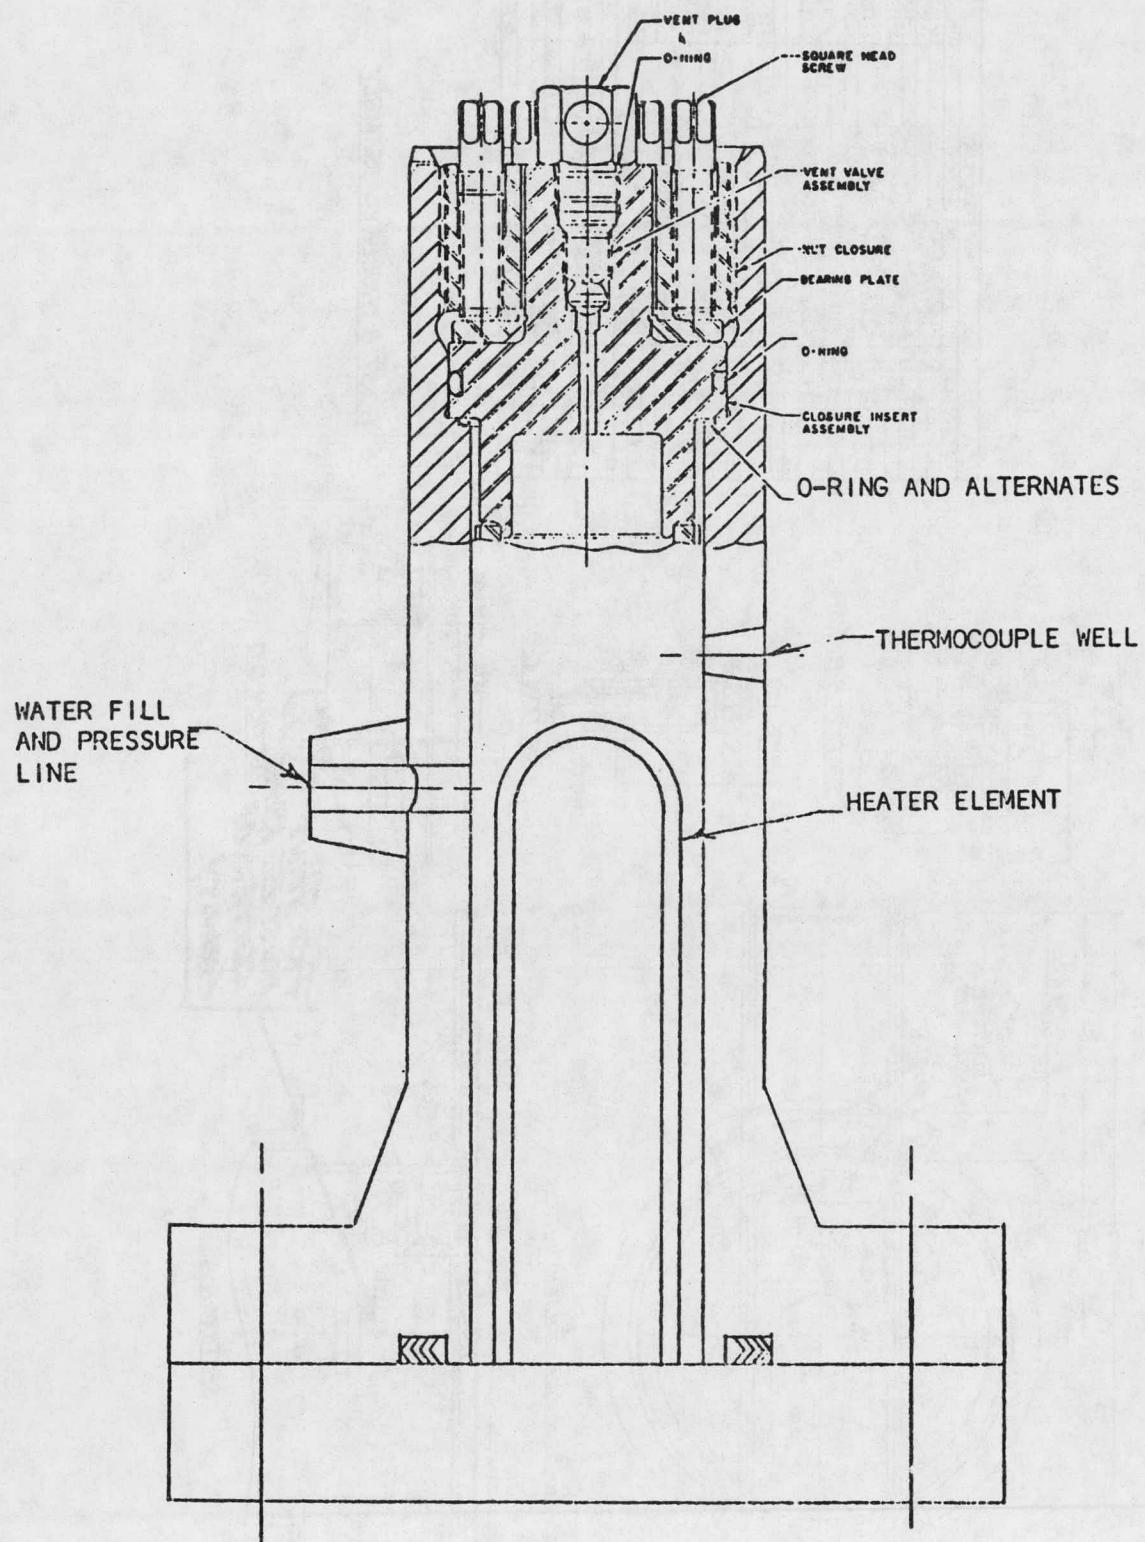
Seal Ring Pressure/Temperature Test Fixture
